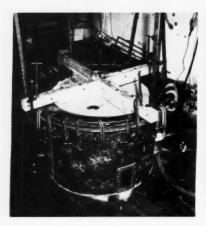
Vacuum Forming Set-Up with Sheet Drawn Clamped and Form Clamped in Place
